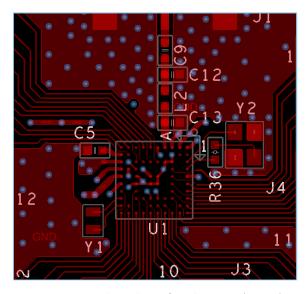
Top layer design for 4-layer PCB (BGA68)
